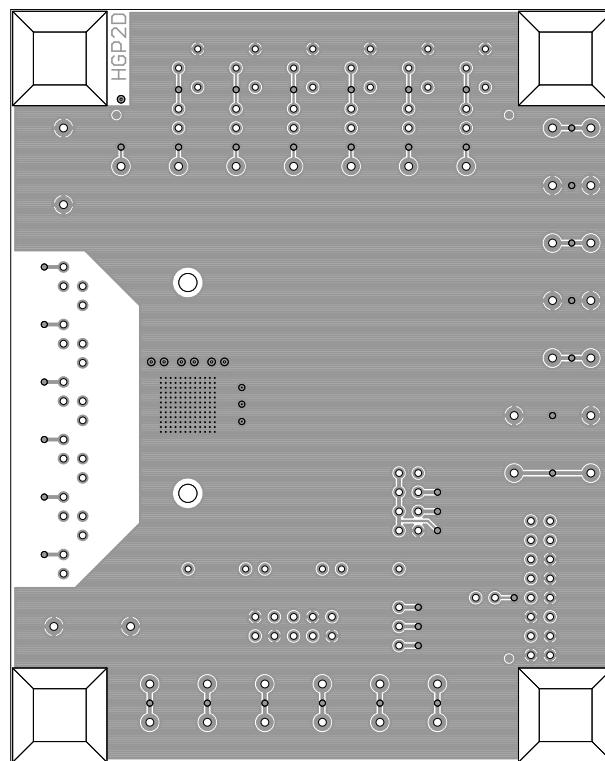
Evaluation board (solder side) with mounting option for heat sink
